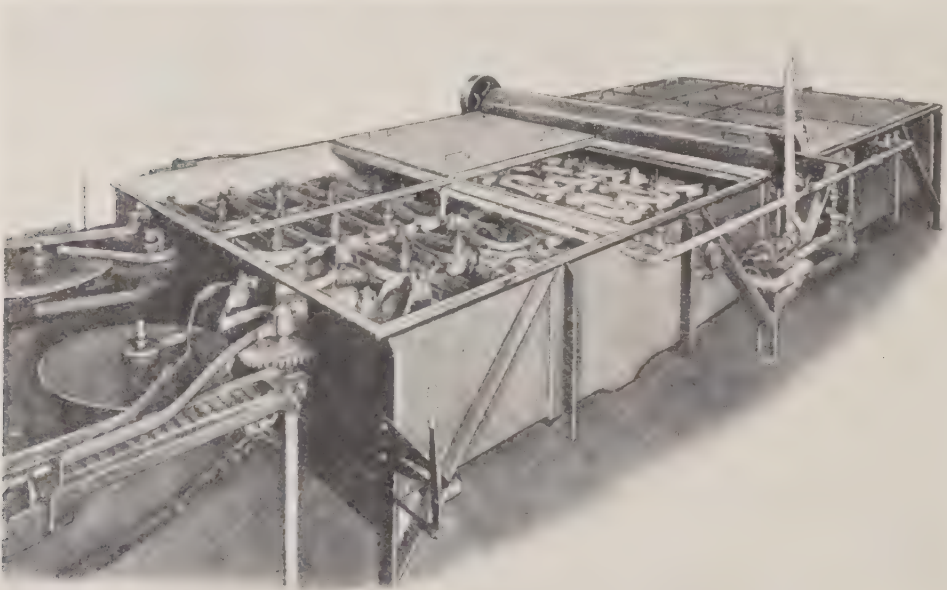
Disc-type exhauster with covers removed to show train of geared discs which convey cans through the exhauster.
